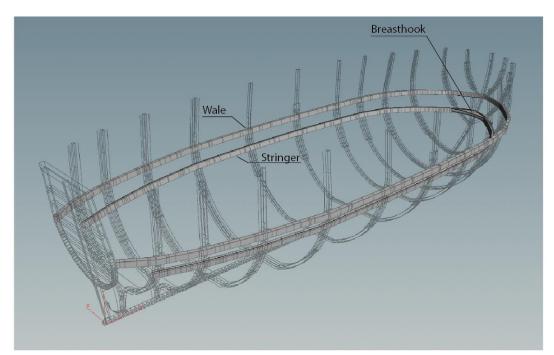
Longitudinal reinforcements: wale, stringer, and breasthook
